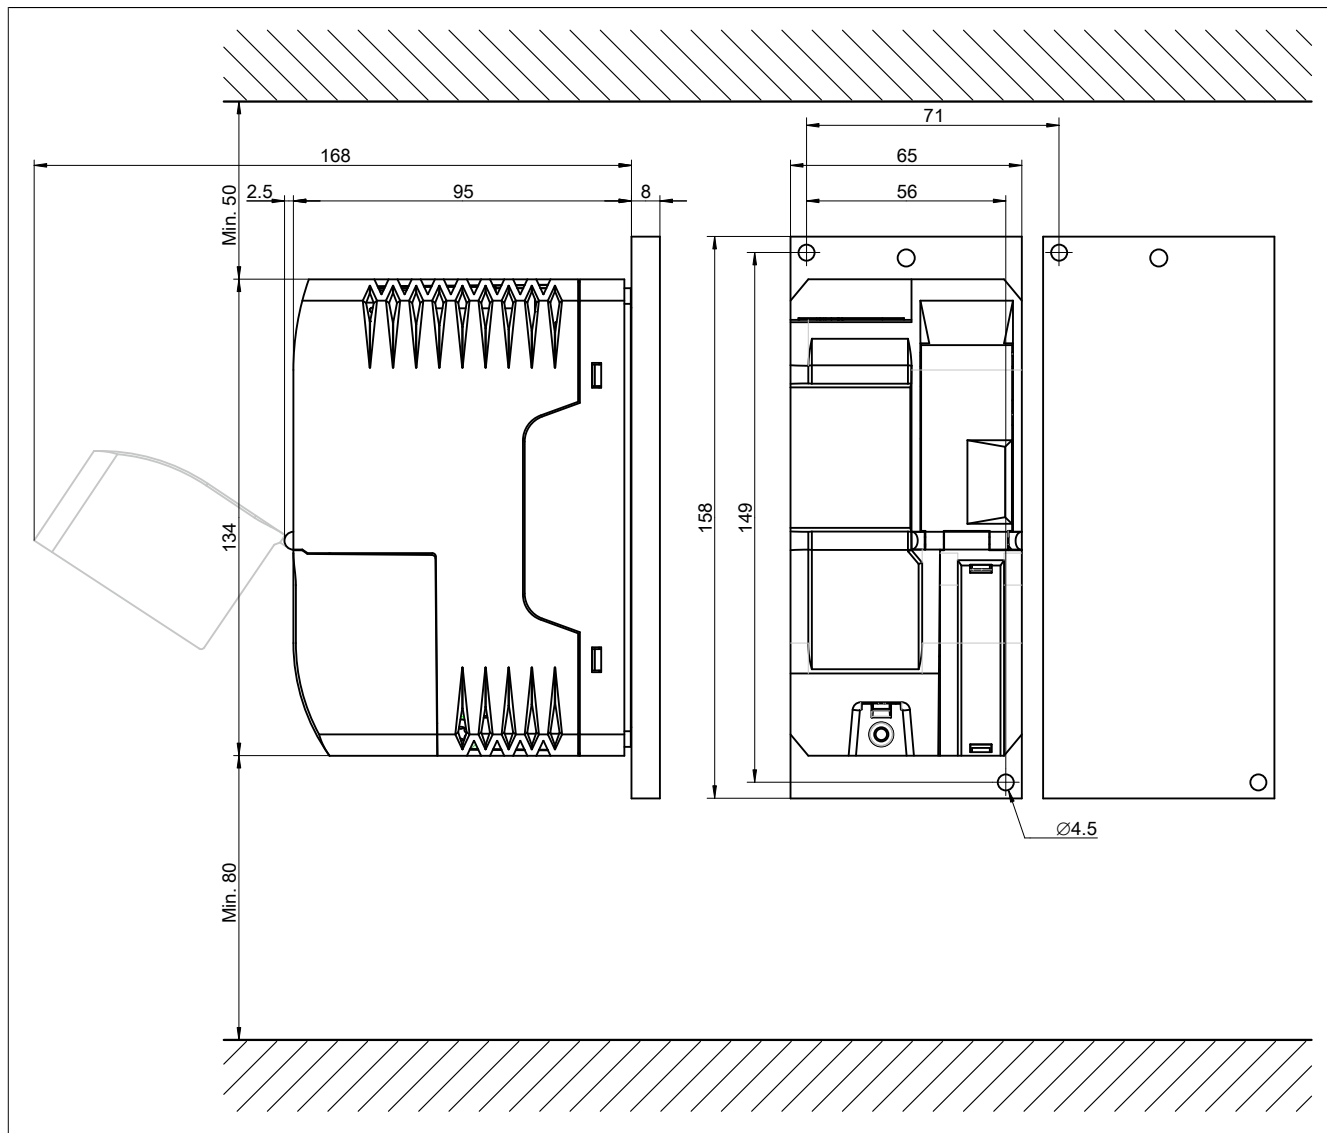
Dimension diagram and installation dimensions for ACOPOSmicro modules with cold plate
